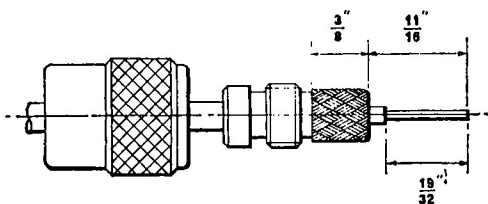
A—Assembly instructions—UHF Type plugs and sockets—Without reducing adaptor
